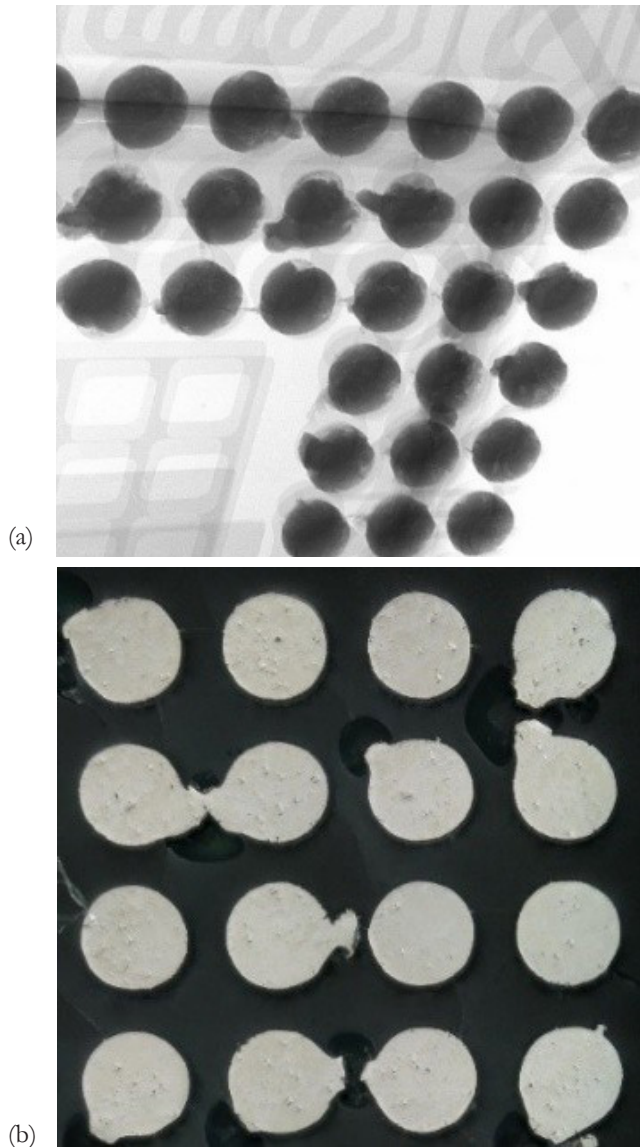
SAC305 assembly after thermocycling (a) X-Ray image of the BGA package and (b) planar cross section of the SAC305 WLCSP assembly.
